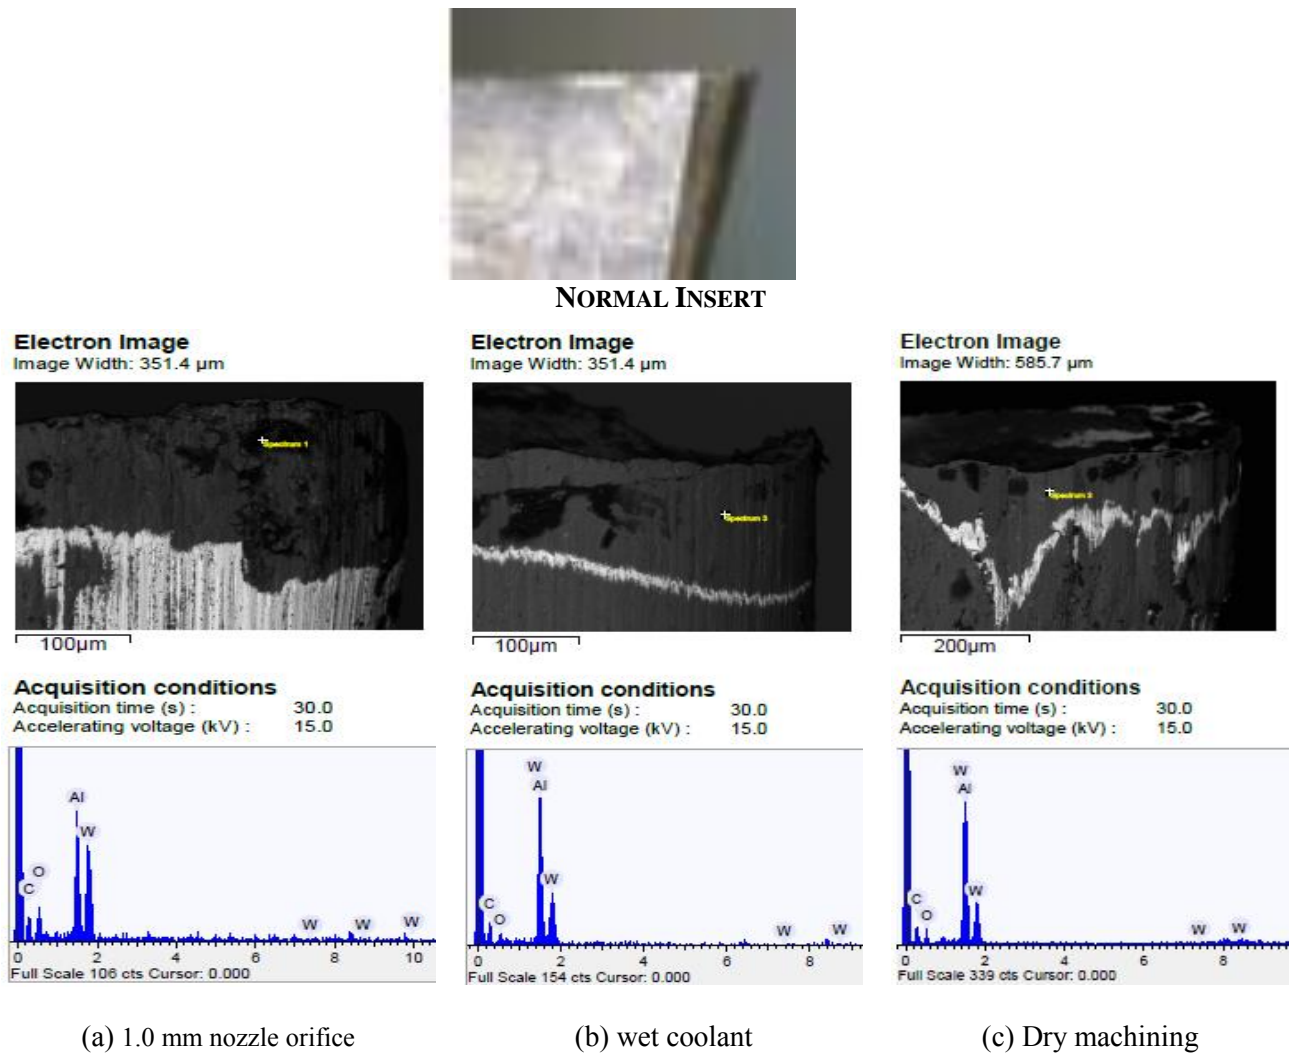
SCHEMATIC ILLUSTRATION BETWEEN 1.0 mm NOZZLE ORIFICE, WET COOLANT, AND DRY MACHINING
